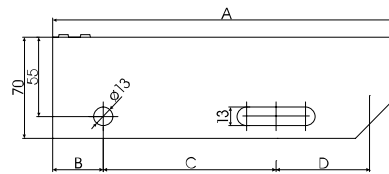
PLATE WITH DIN BORE, BEARING BAR HEIGHT UP TO 40 MM
